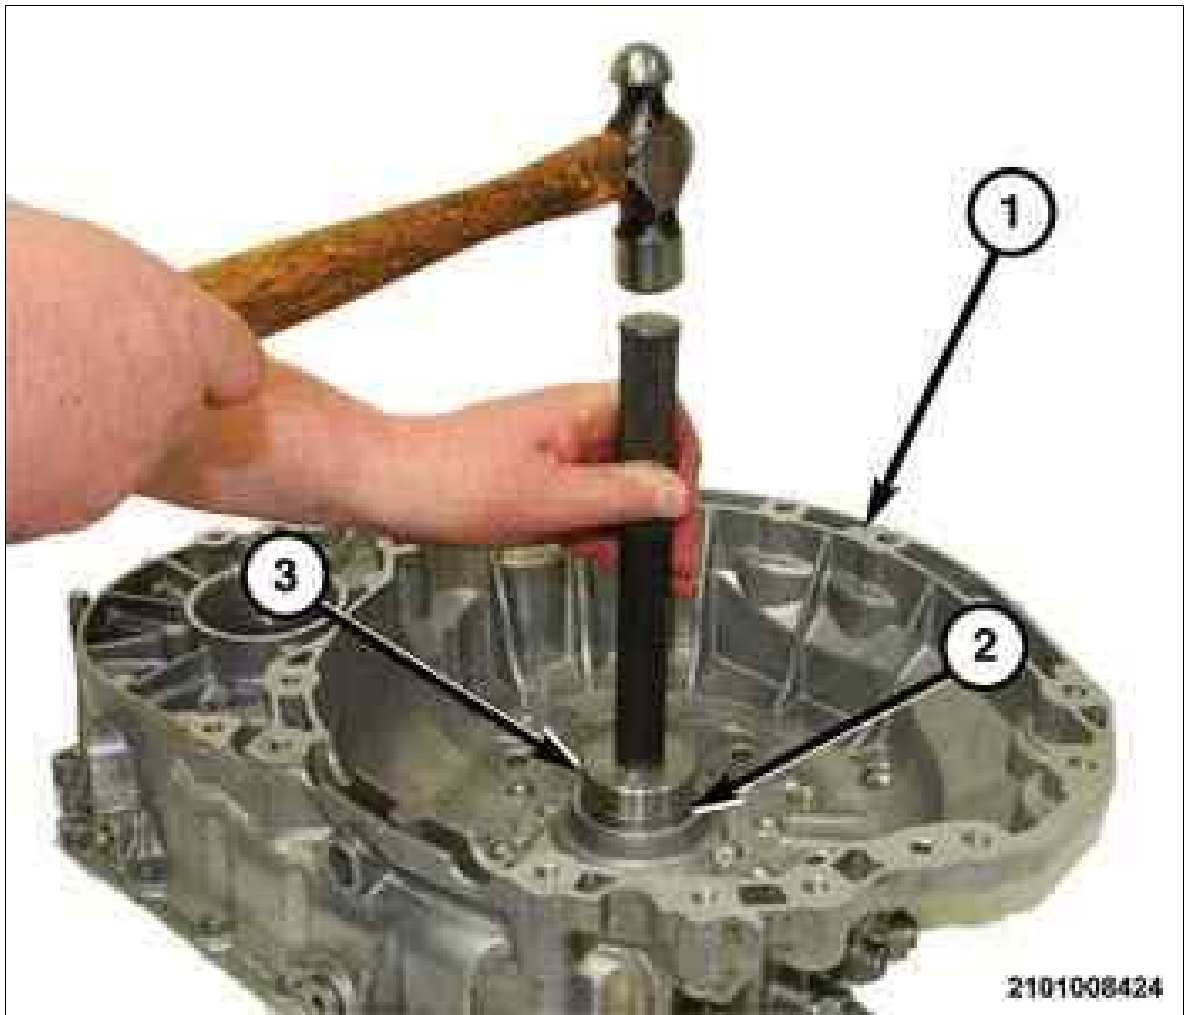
Installing Oil Pump Sprocket Needle Bearing Into Bellhousing
